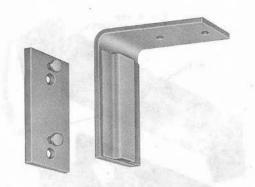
KS-16422, List 4 Mounting Bracket Assembly
